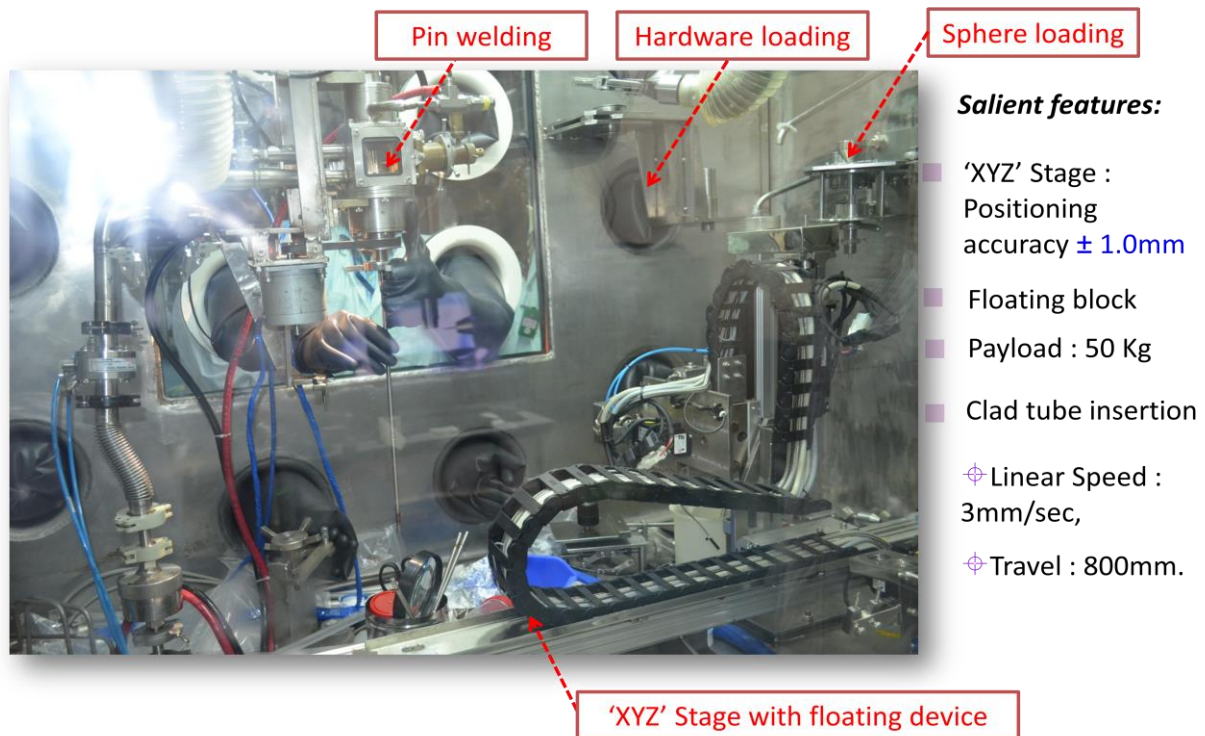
Photograph showing the fuel pin welding facility inside a glove box.
